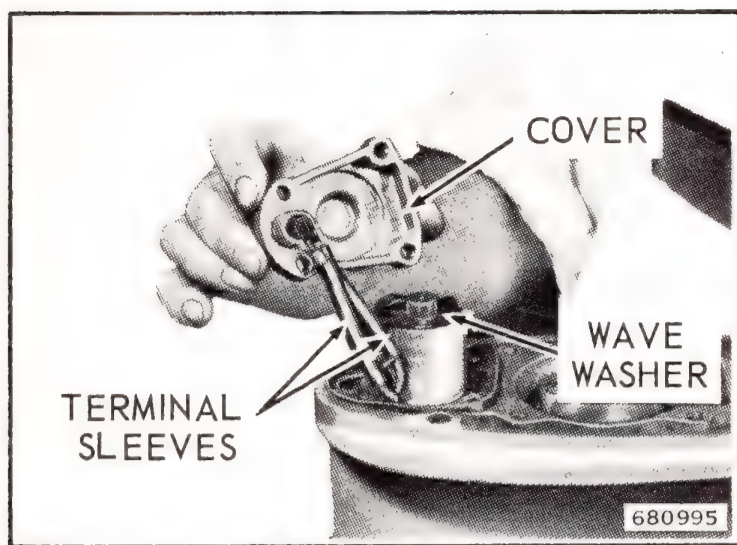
Shift Cable to Solenoid Lead Terminals
